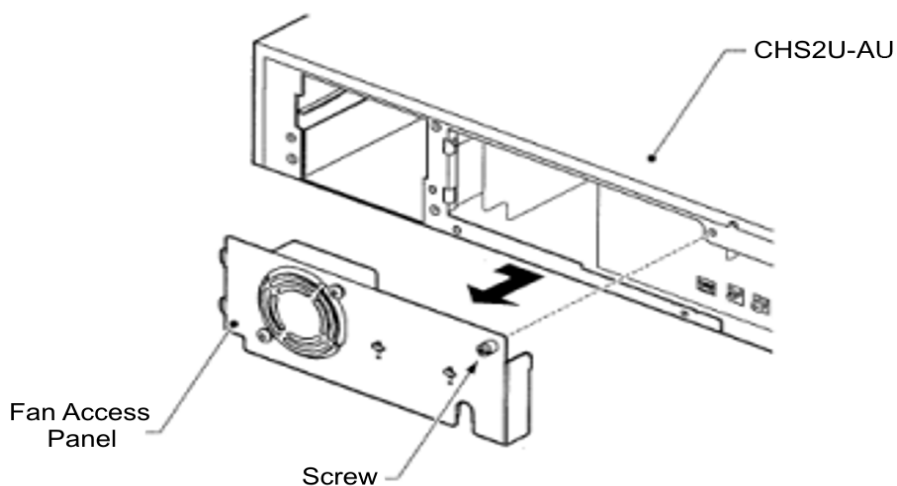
Removing Fan Access Panel CHS2U-AU
